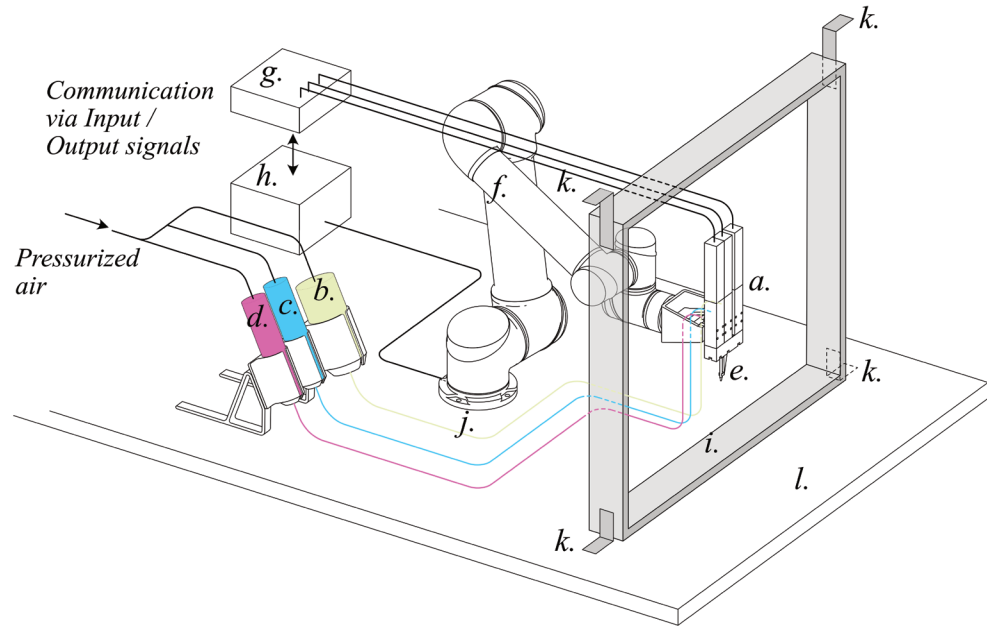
Schematic illustrating the hardware setup for on-substrate AM: (a) extruder head, (b) Des-modur N3600, (c) Desmophen VP LS 2249/1, (d) Desmophen VP LS 2328, (e) static mixer, (f) Universal Robots UR5 collaborative robot arm, (g) extruder head controller, (h) robot arm controller, (i) wooden frame, (j) mounting base of robot arm, (k) metal brackets, (l) table.
